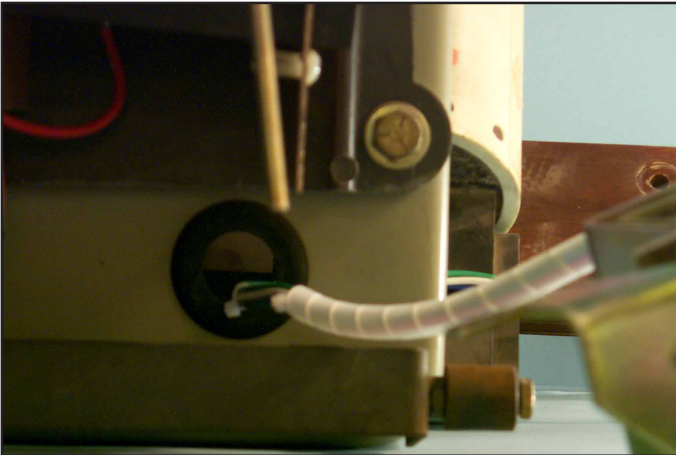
Sensor Harness Routed to the Back of the Breaker.
